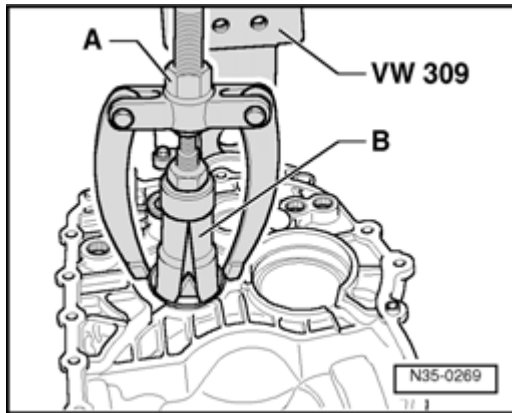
Pulling tapered roller bearing outer race out of transmission housing
